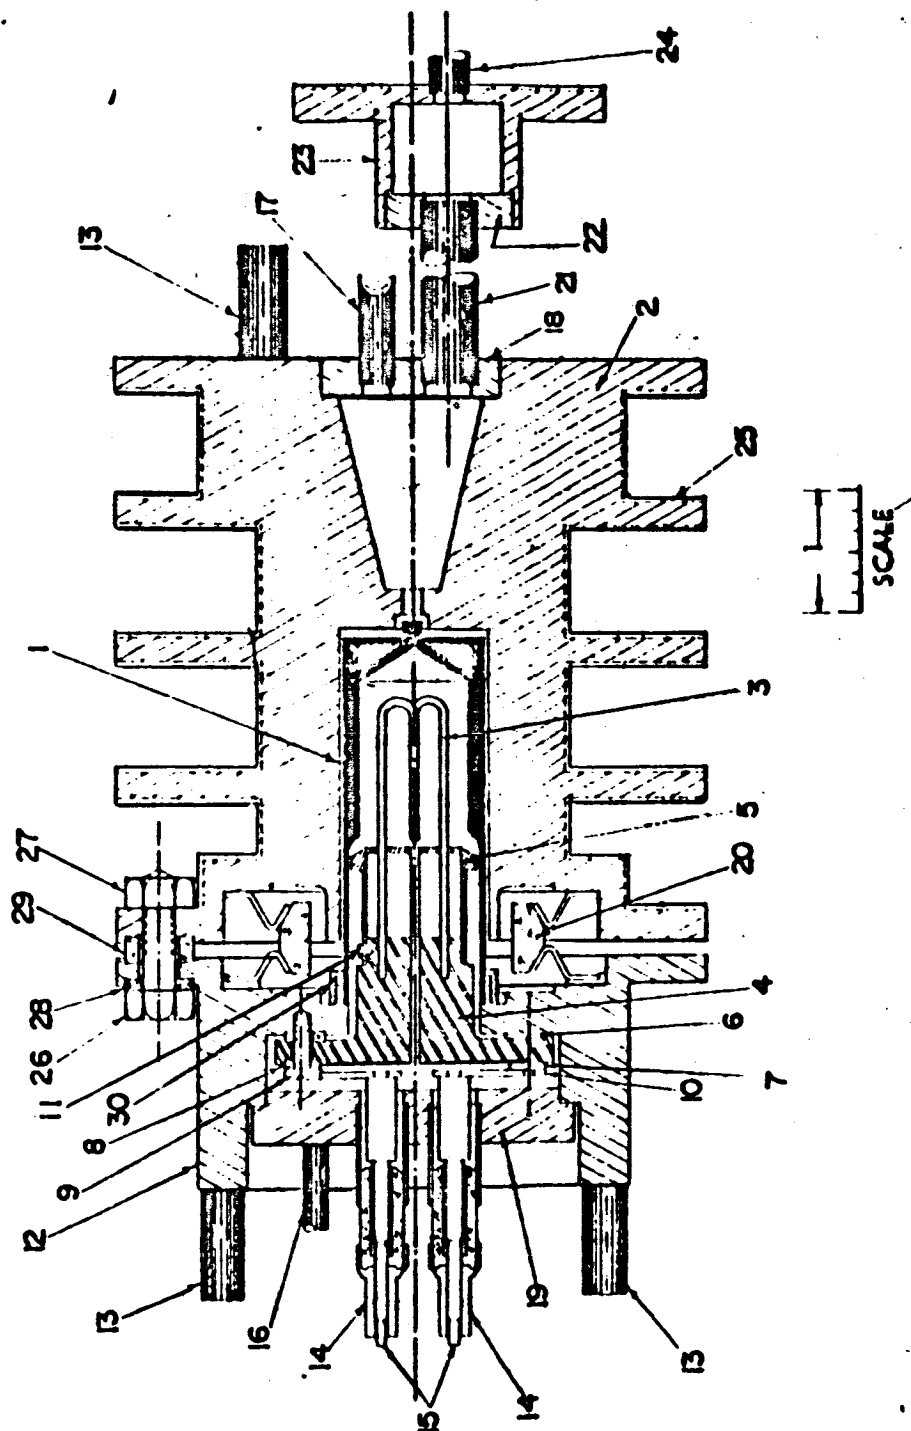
CESIUM CONVERTER ASSEMBLY
